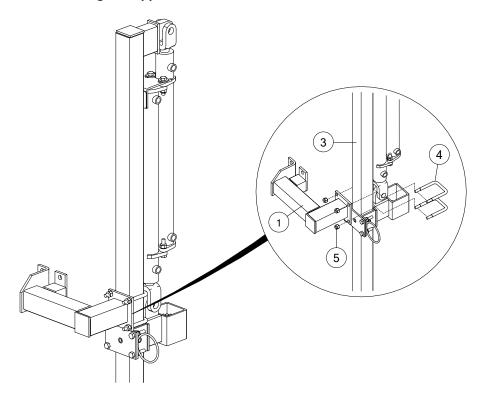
Installing the Lower Mount Plate to the Slide Tube
